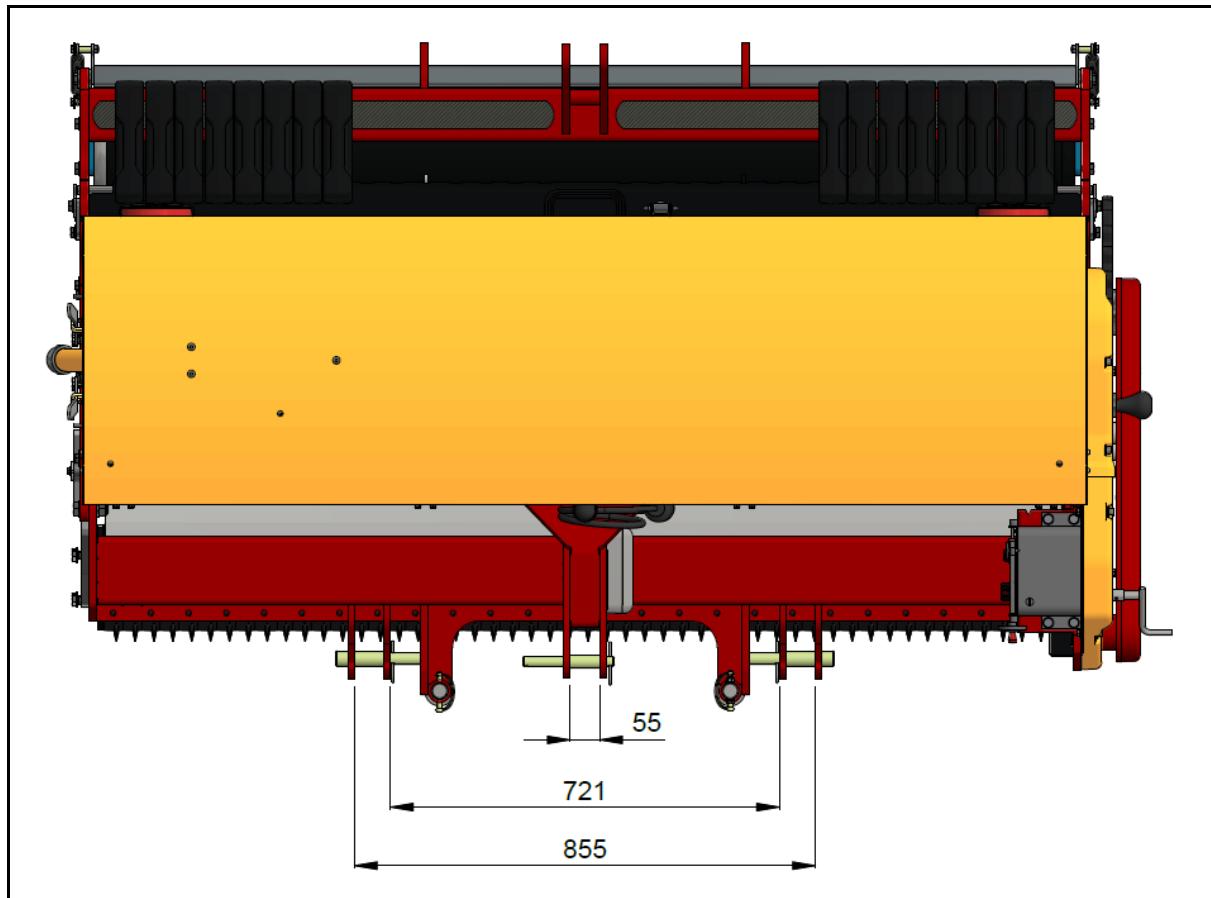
Dimensions of DZ5 Stitch compact, top view
